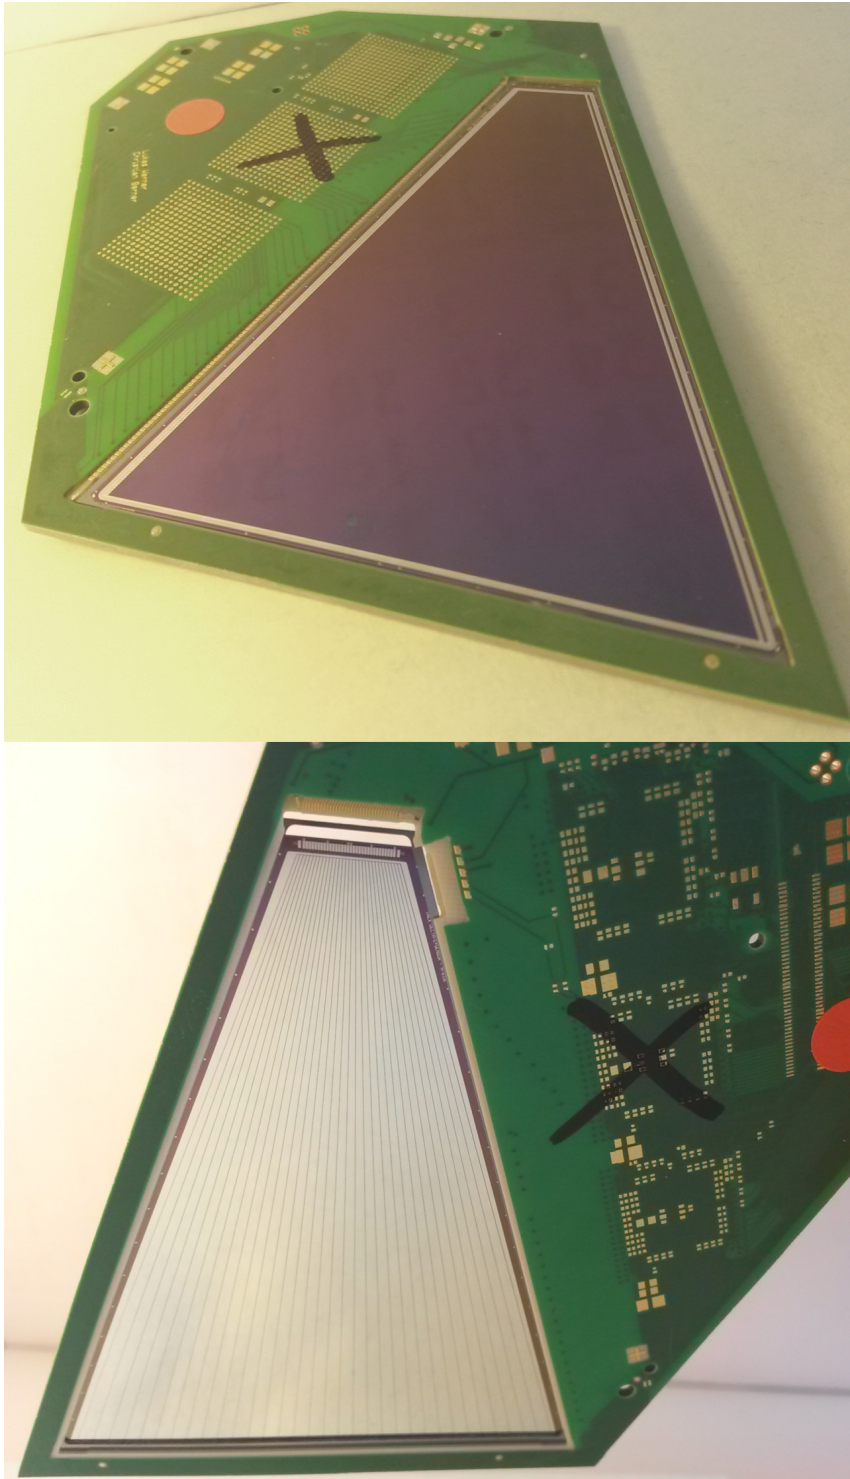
Dummy DSSSD fitted into the Hybrid PCB.
